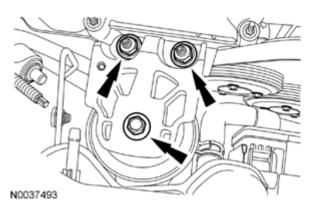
Locating Engine Mount Bracket Nuts And Bolts Courtesy of FORD MOTOR CO.
